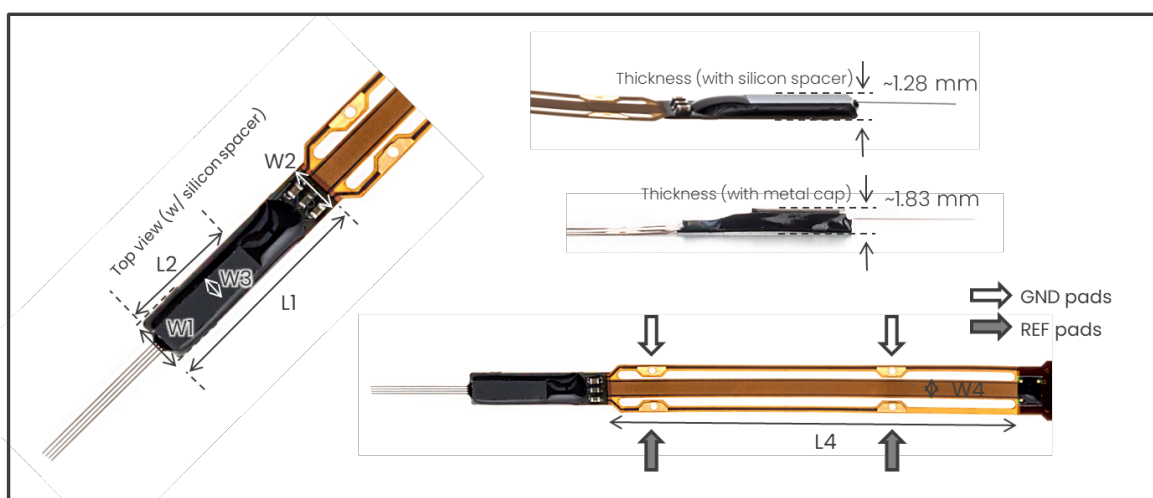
Left: Dimensions of a probe package with silicon spacer. Top right: Thicknesses of the probe package with silicon spacer and probe package with metal cap. Bottom right: Dimensions of the flex and locations of REF/GND pads along the flex. Dimensions are in mm.
